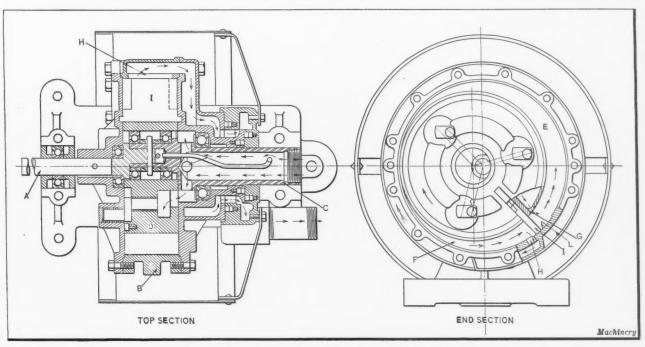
Sectional Views of the Vacuum Pump used in Connection with the Equipment Described
